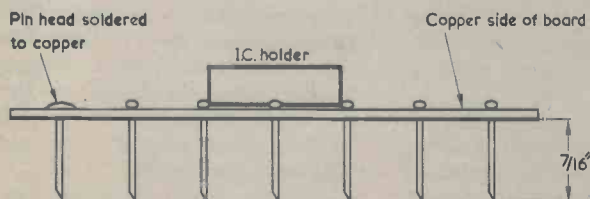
Side view illustrating the method of assembly. In practice, the i.c. holder is fitted to the board after all the pin heads have been soldered to their copper areas
